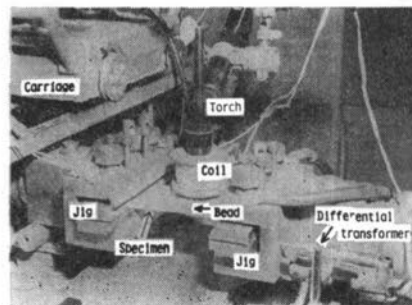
Setup of GTA welding torch, magnetic coil, specimen on Vatrach tester
